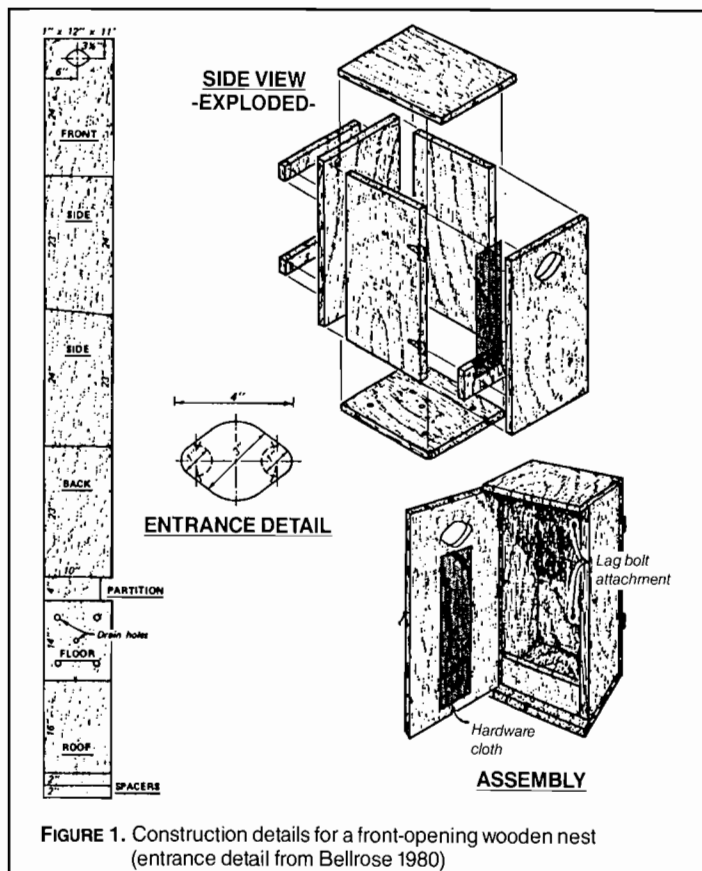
Construction details for a front-opening wooden nest (entrance detail from Bellrose 1980)
